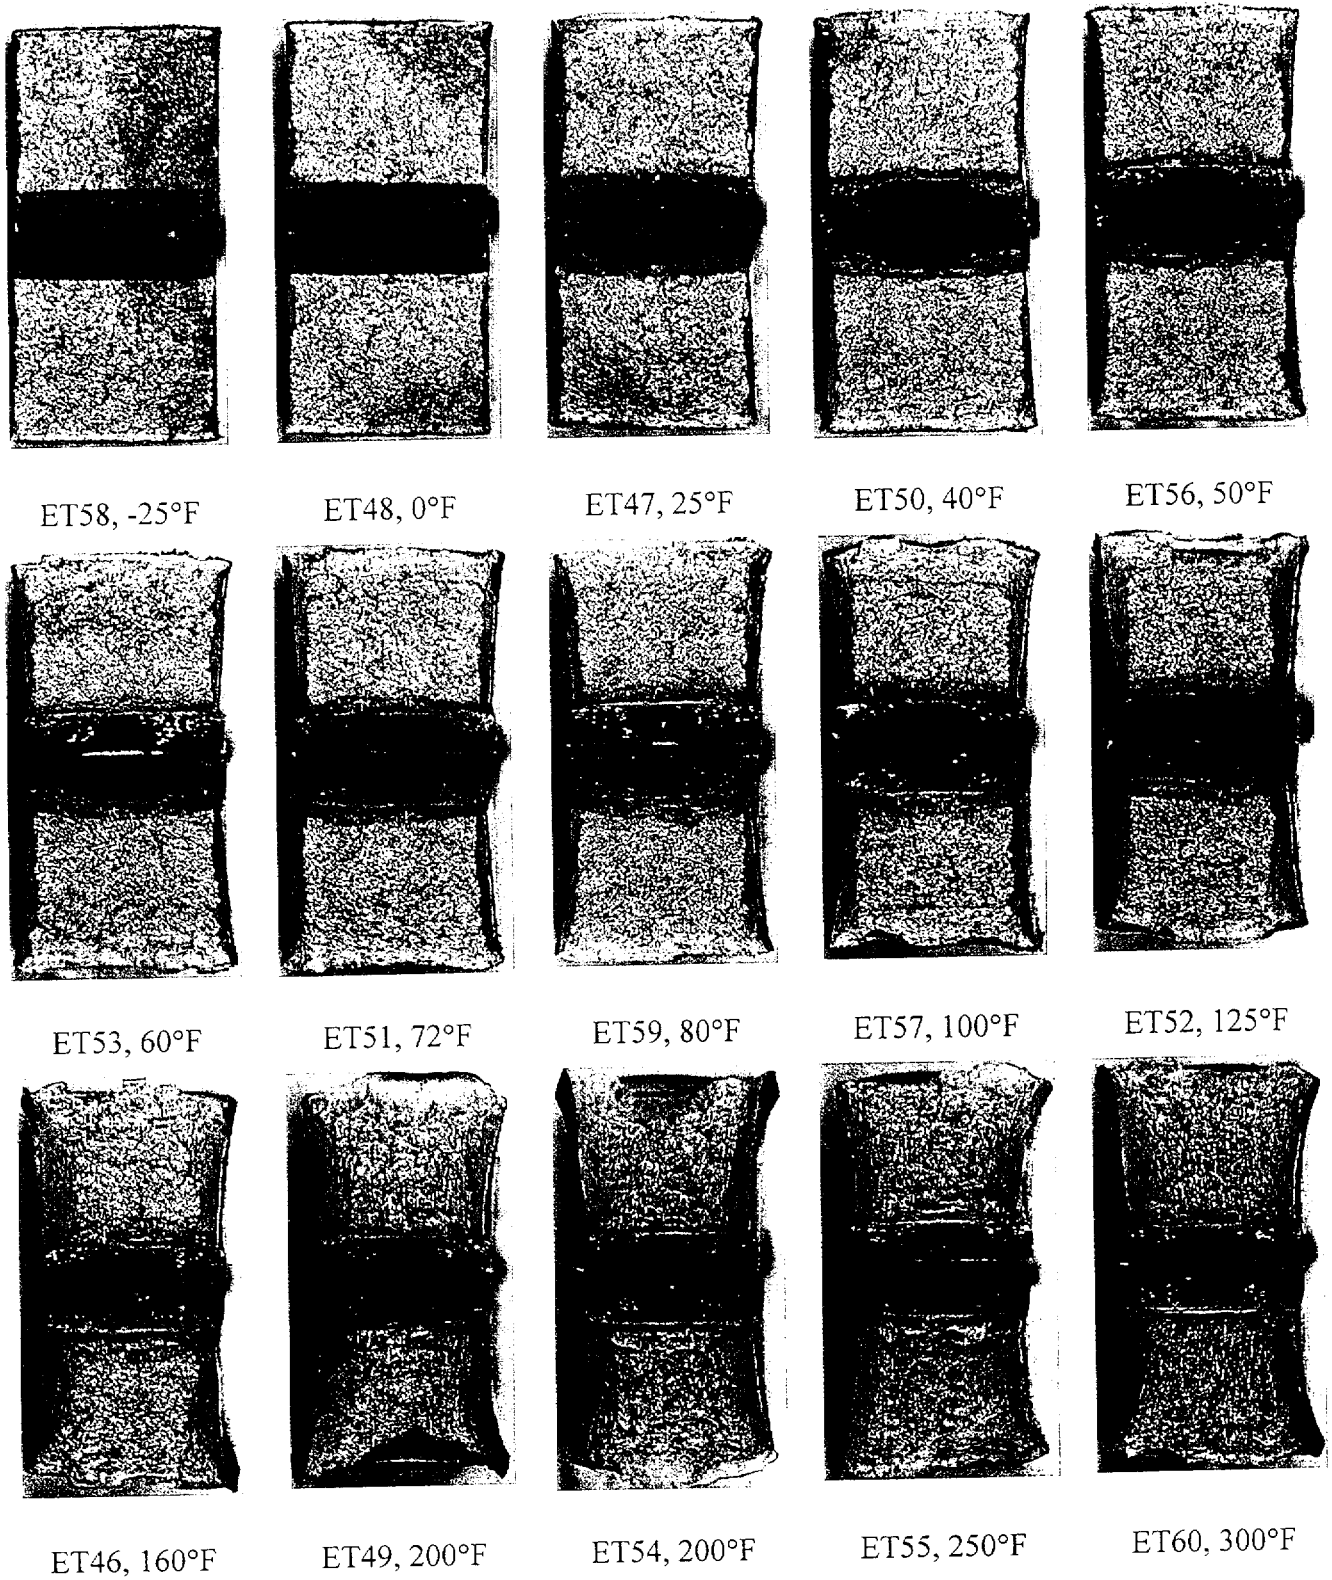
Charpy Impact Specimen Fracture Surfaces for Millstone Unit 3 Reactor Vessel Intermediate Shell Plate B9805-1 (Transverse Orientation)
